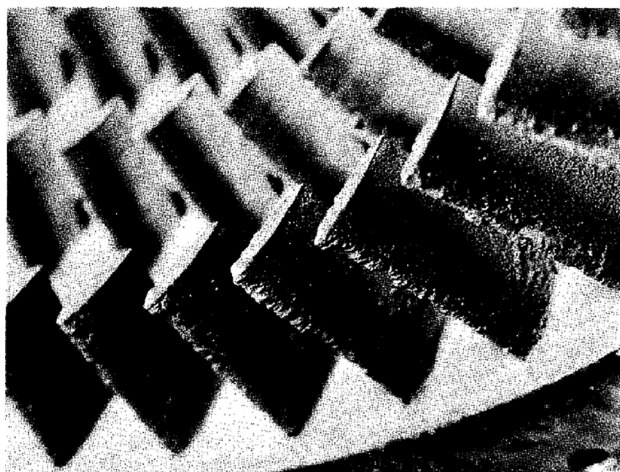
Axial-flow compressor stator blading showing oily carbonaceous deposits [90]
